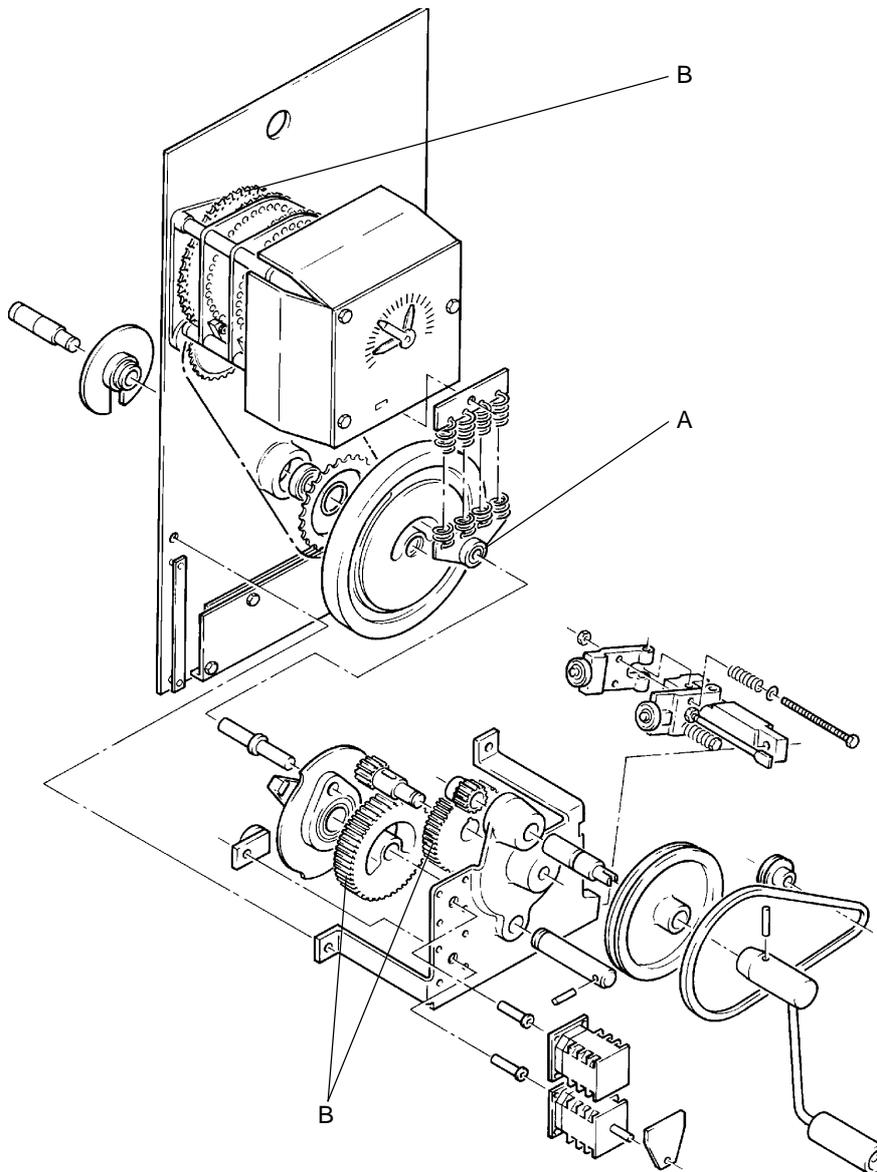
Motor-Drive Mechanism BUF3, lubrication points
